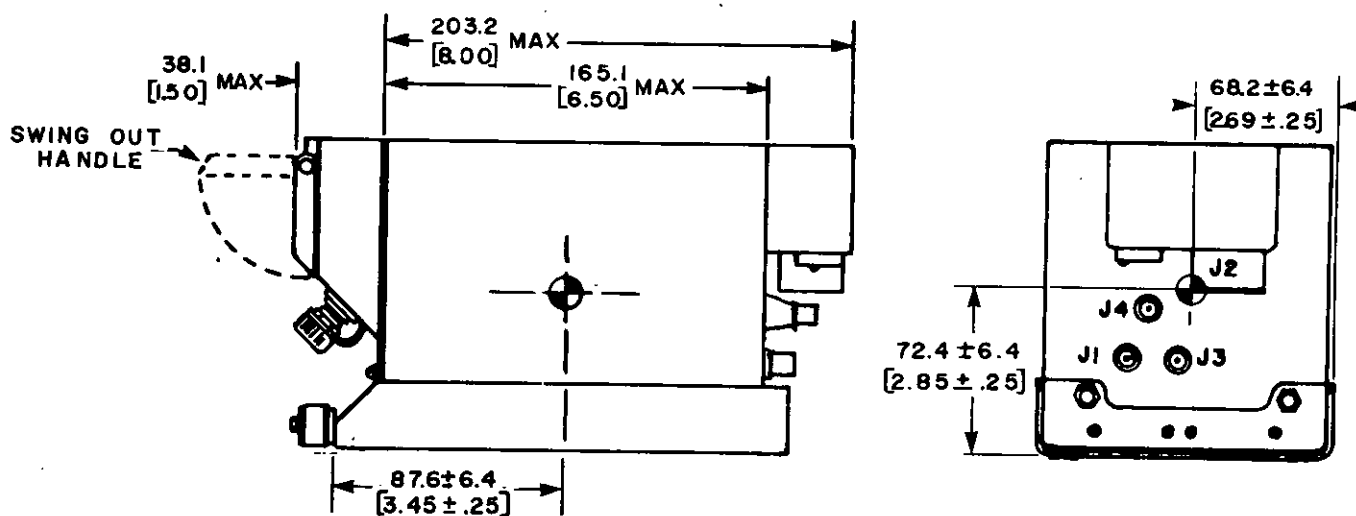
Electronic Equipment Mounting Base MT-4934/ARC and Radio Receiver-Transmitter RT-1250A/ARC, outline and mounting dimensions
